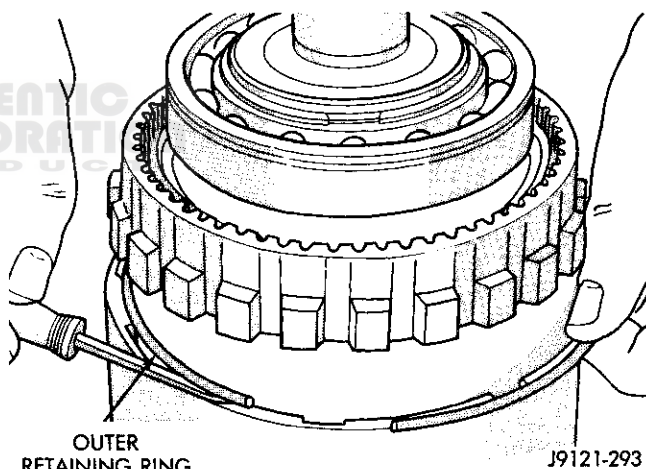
Removing Clutch Drum Outer Retaining Ring
